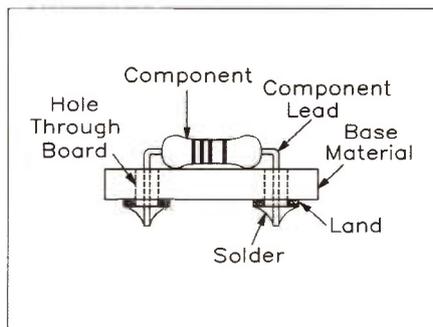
Cross-section of a single-sided, through-hole PCB with a leaded component.
